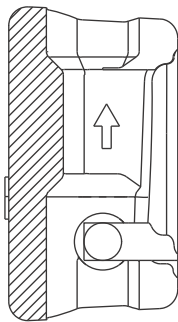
Sectional drawing COMFORT PM AUTO_{ADAPT}
